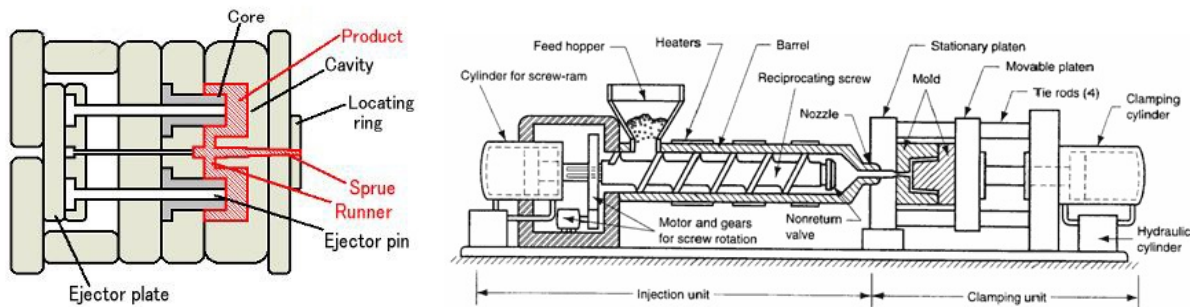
Diagram of Mold Cavity (Left,<http://injectionmolding.blog.quickparts.com>) and Injection Molder (Right,<https://www.xcentricmold.com>)
